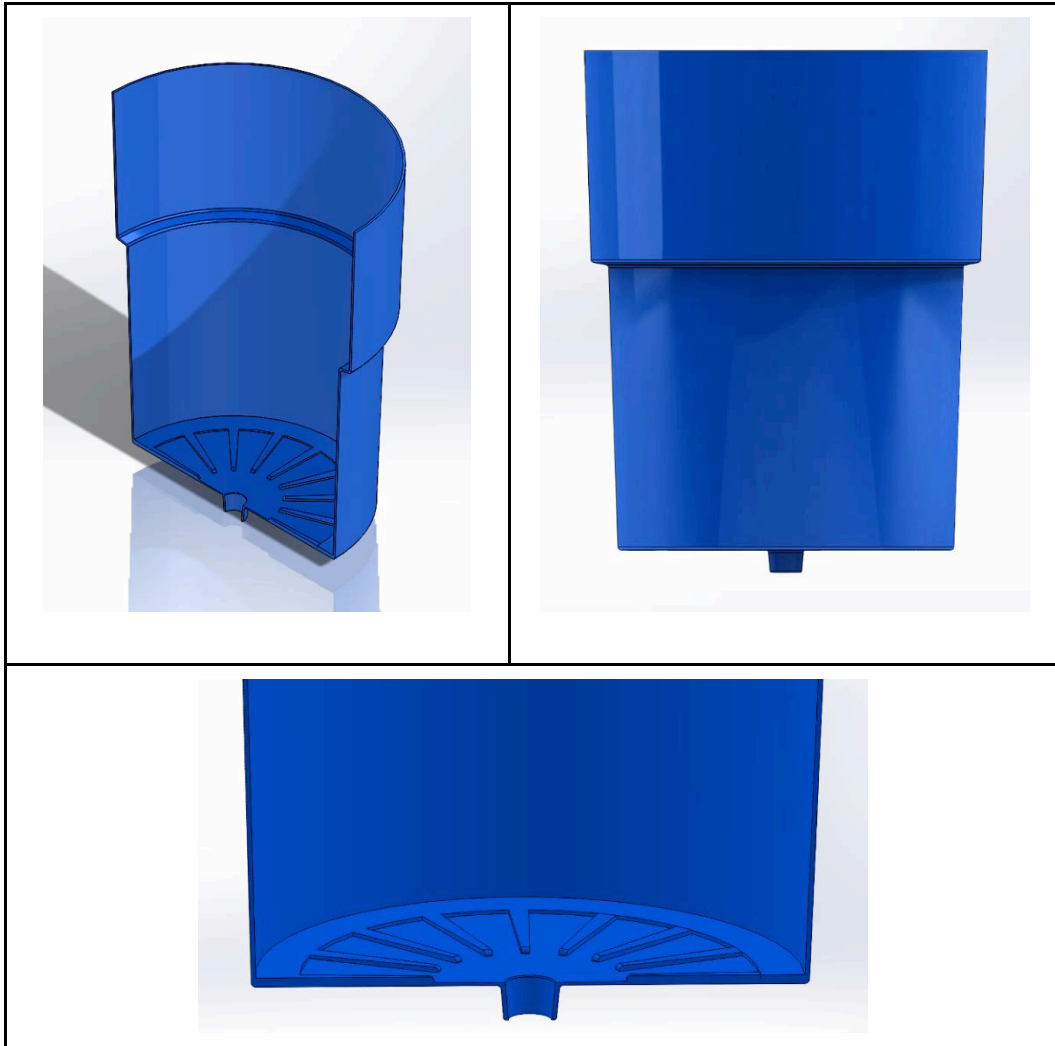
More detailed views of the shell (clockwise from top right): isometric cutaway view, front view, and close up cutaway view of the raised spokes on the bottom of the shell.
